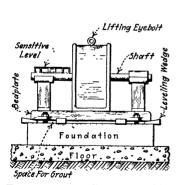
Leveling a machine lengthwise with level on shaft.
